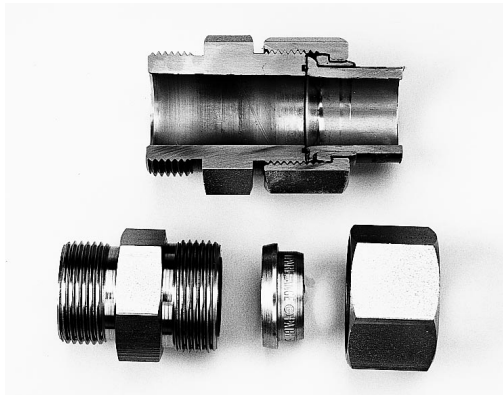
Flange Style Seal-Lok Fitting Components (nut, sleeve, fitting body with O-rings) and Assembled Seal-Lok Fitting Cutaway
